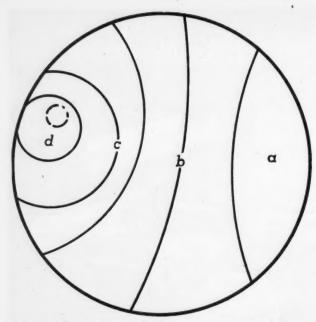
Diagram Fractured Axle & face. a - Origin fracture, worn smoo by rubbing of c tacting surfaces; b center of area of taining lines indic ing successive fro tures; c—area unta nished but dull ar velvety; d — brig granular surface fresh fracture.
